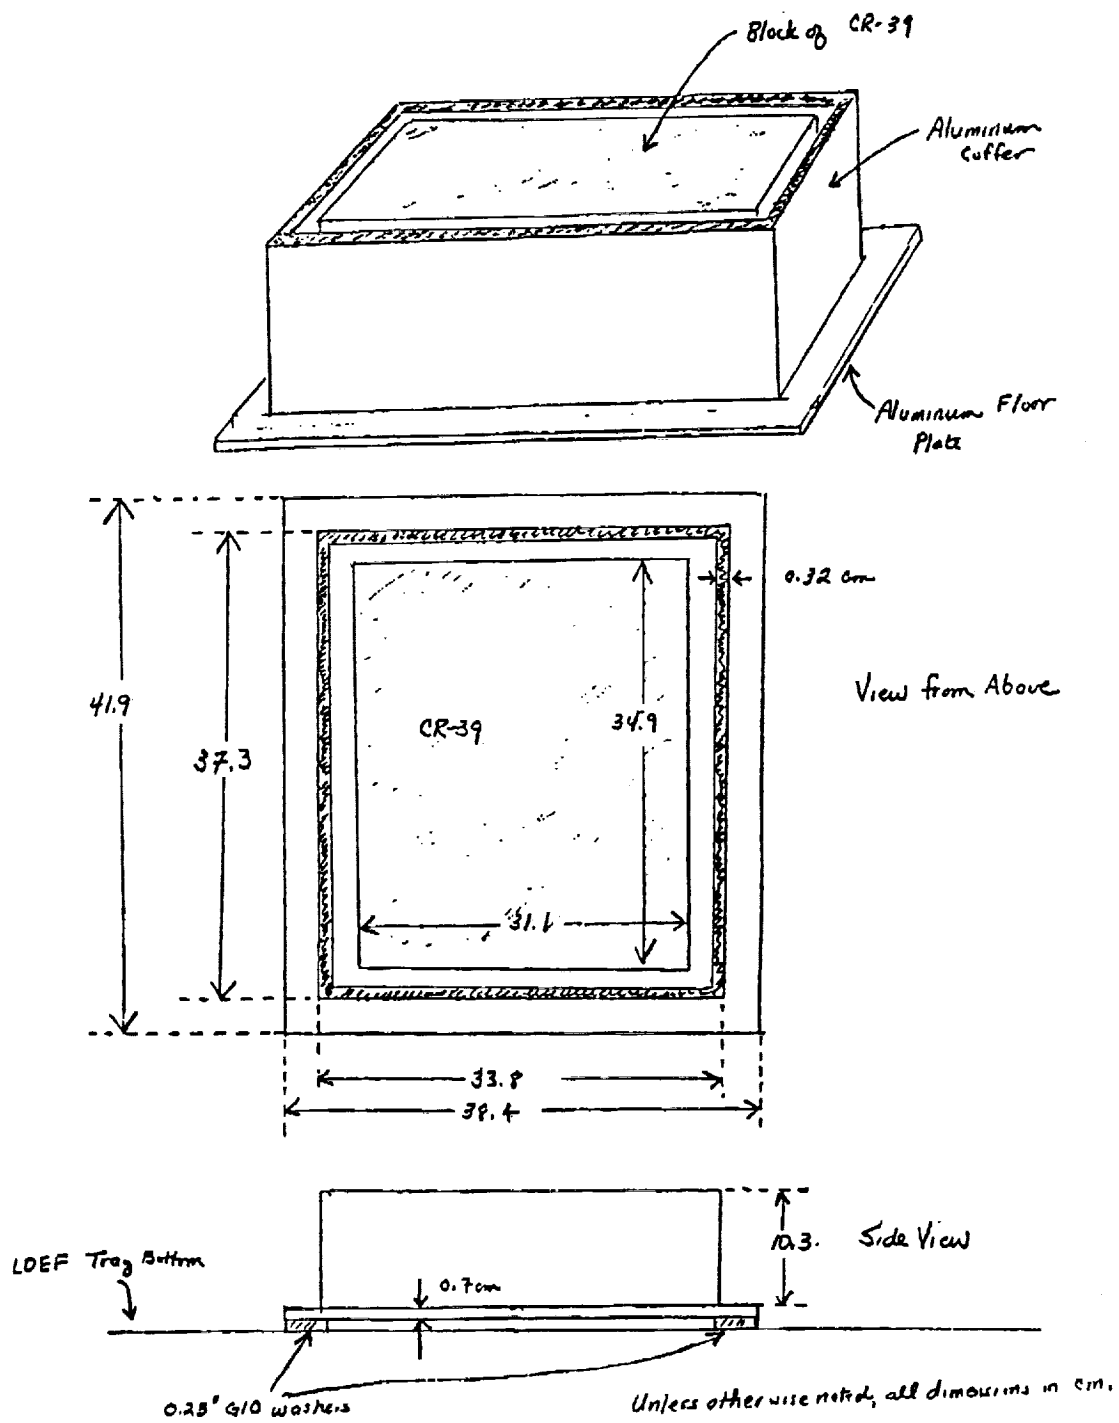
Single module dimensions for Exp. M0001 detectors, from Ref. 18.
